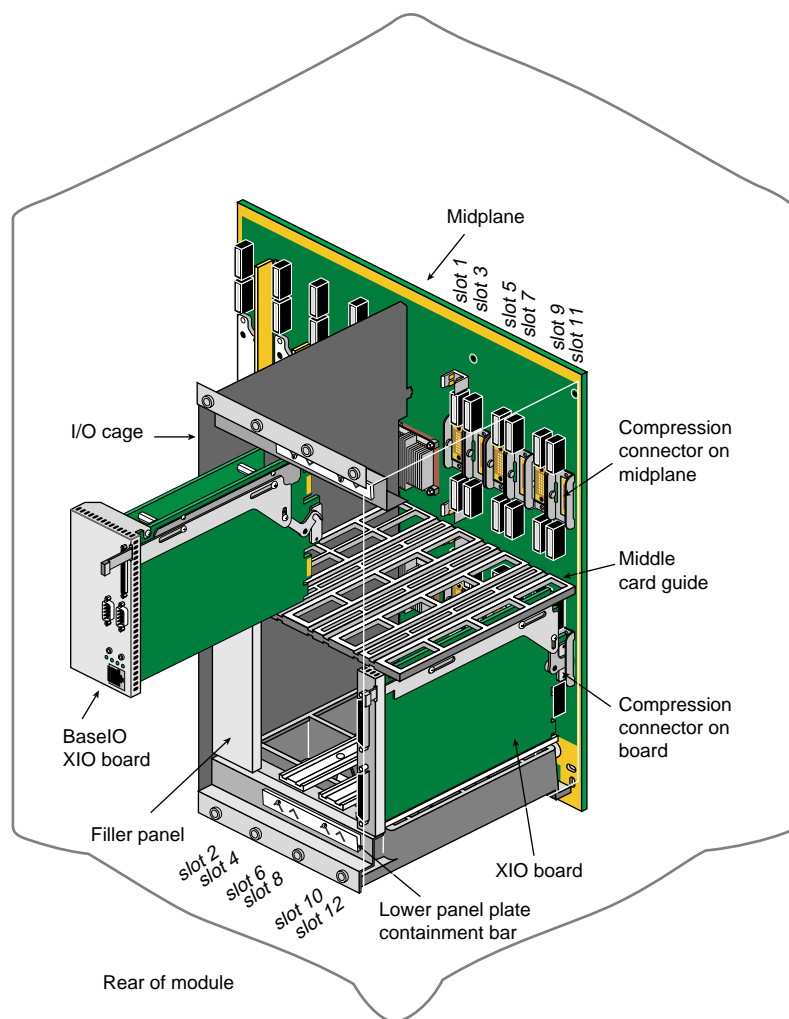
I/O Components in the Origin2000 Chassis and Onyx2 Rackmount Chassis
